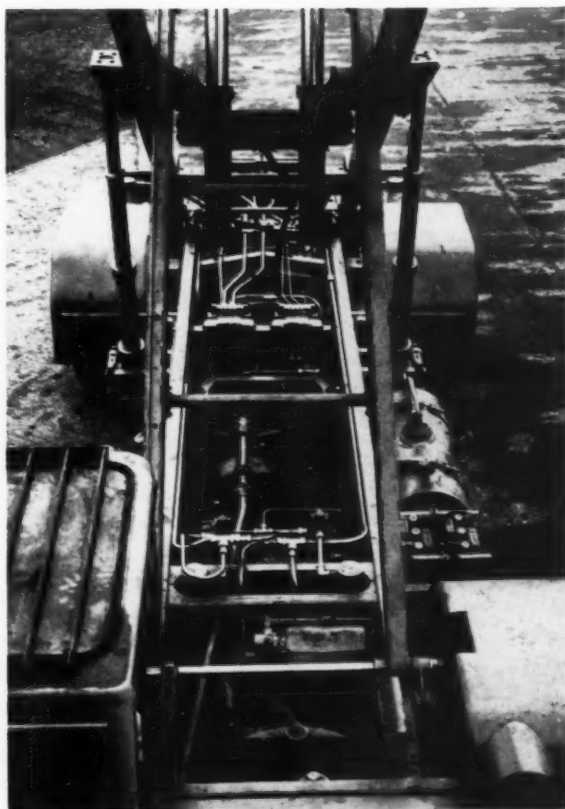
This view from the front shows the massive construction of chassis and platform mechanism
